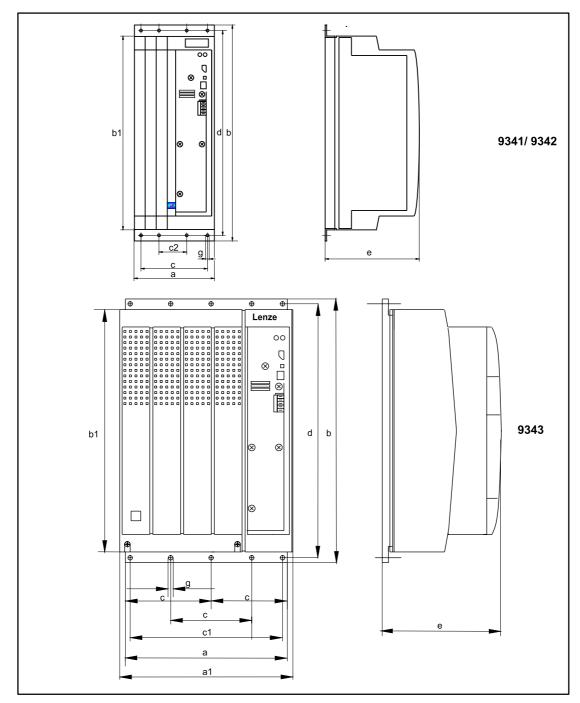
Dimensions for the assembly of the 934X-V003 "Cold plate" variant
